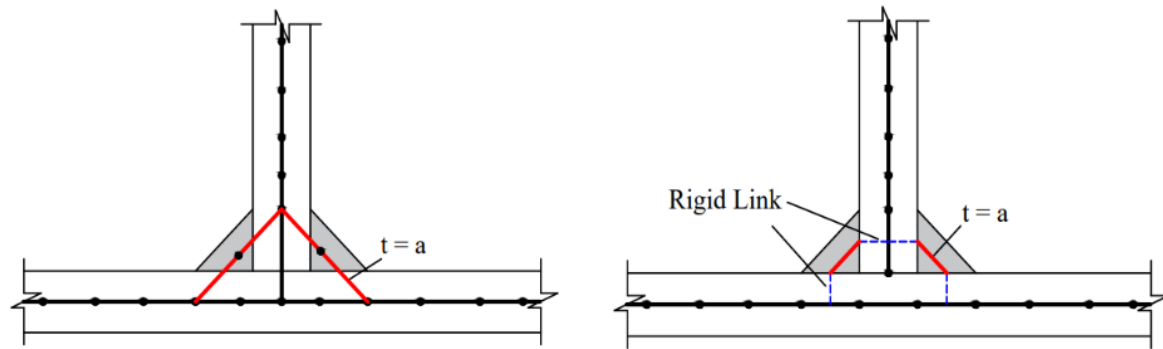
Fillet welds modelled in T-joints, (a) Inclined elements having mid-side nodes and Inclined elements connections with rigid links [46].
